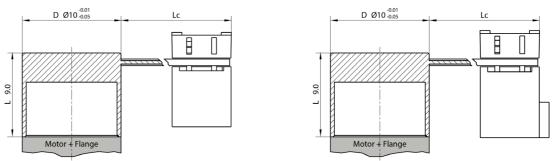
Dimensional Drawing [mm] – ENX 10 QUAD with 6pole IDC Connector (left) / with 10pole IDC Connector (right)
